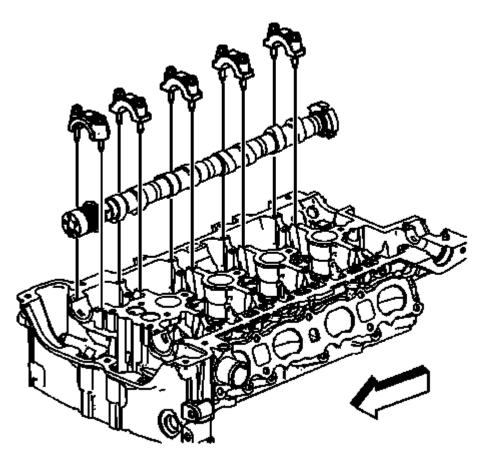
Exhaust Camshaft And Caps Courtesy of GENERAL MOTORS COMPANY
